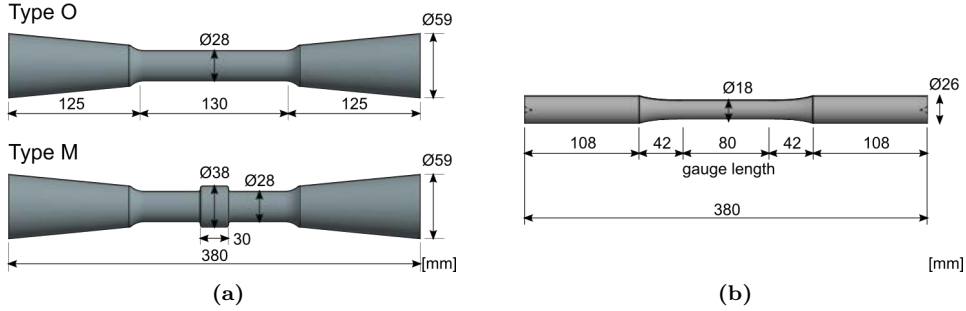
a) Casting geometry of the tensile specimens; b) Test geometry machined by turning
